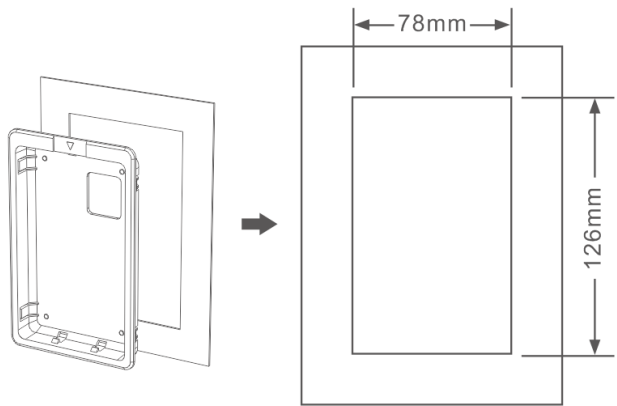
Installation dimensions of dual display external keyboard bracket (mm)
